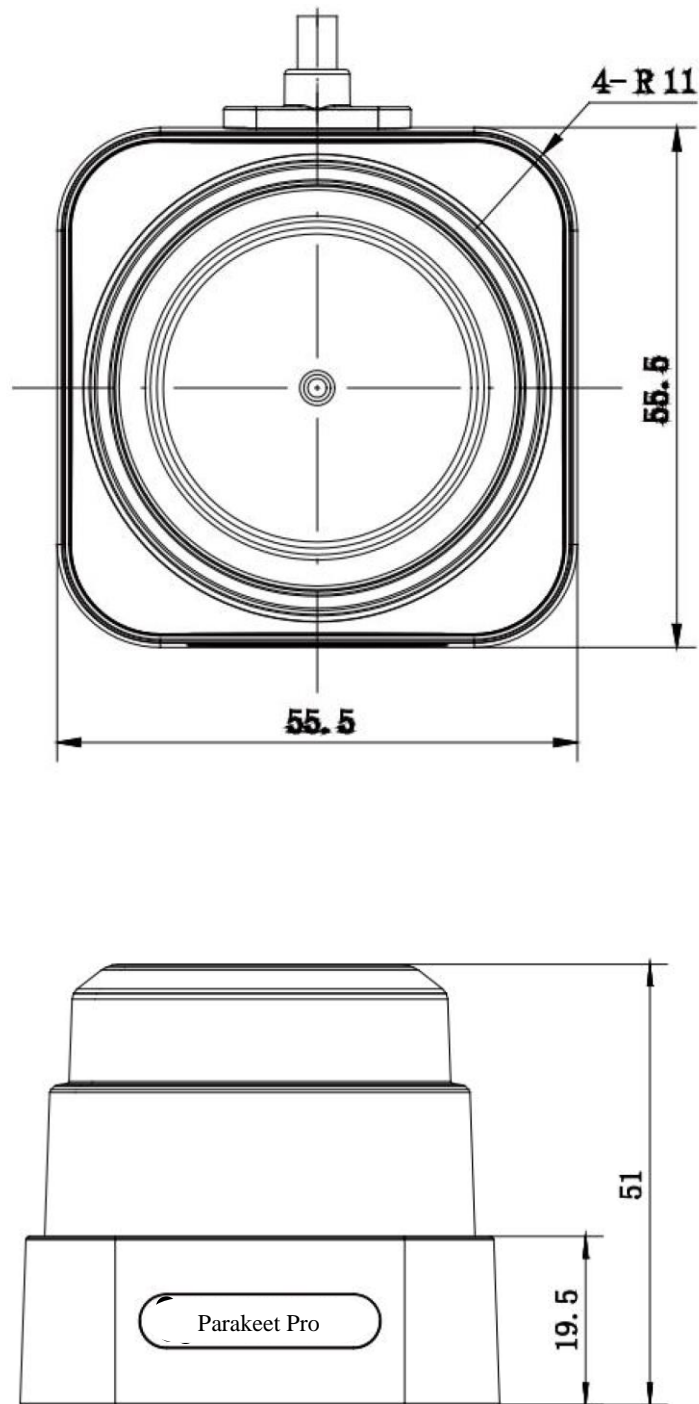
Sensor dimensions of Parakeet ProE. Units (mm)
